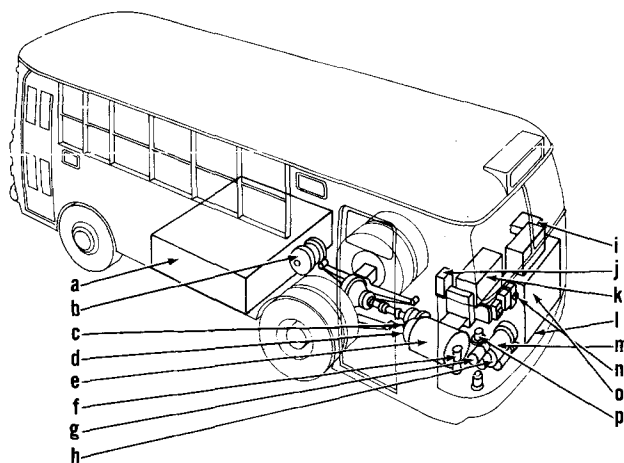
Sectional view of Osaka electric bus. a, Power unit (batteries); b, air tank; c, parking brake; d, first stage reduction gear; e, main motor; f, air compressor; g, oil pump; h, auxiliary motor; i, forward/reverse transfer device; j, auxiliary battery; k, controller; l, controller; m, voltage convertor; n, no-break fuse; o, controller; p, controller.
